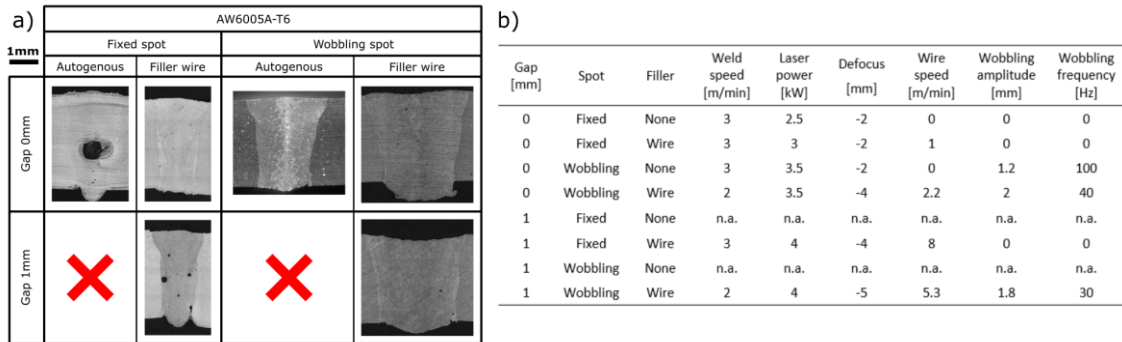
AW6005A-T6 welds: a) sections of samples; b) process parameters. Red crosses and 'n.a.' refer to failed combinations
